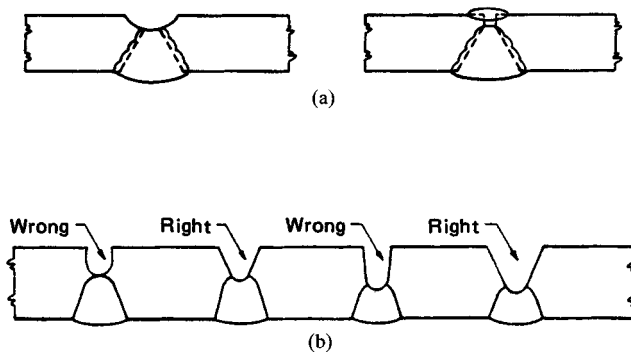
(a) Without back-gouging, penetration is incomplete; (b) proper back-gouging should be deep enough to expose sound weld metal. (*The Lincoln Electric Company.*)
